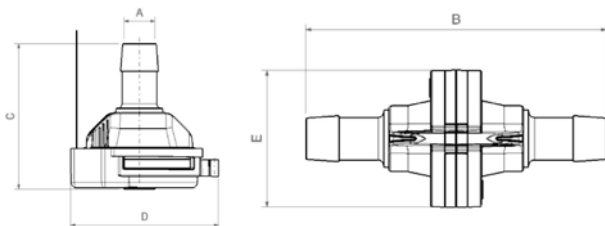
Kleenpak Presto drawings with labels for dimensions (a) and (b).
